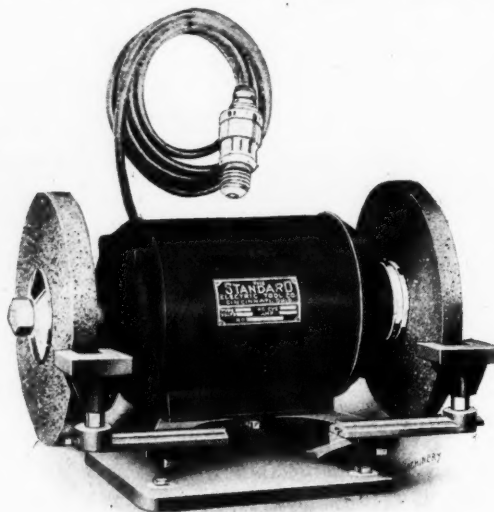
Grinder shown in Fig. 2 converted into Bench Grinder
